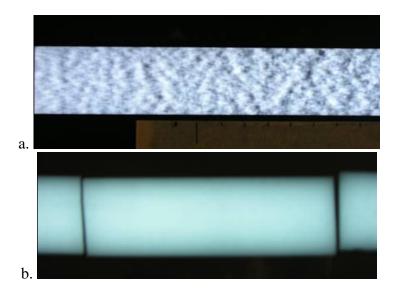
a) Radiographic image of Zr co-rolled foil, b) Radiographic image of Zr co-rolled foil after cold rolling operation.
